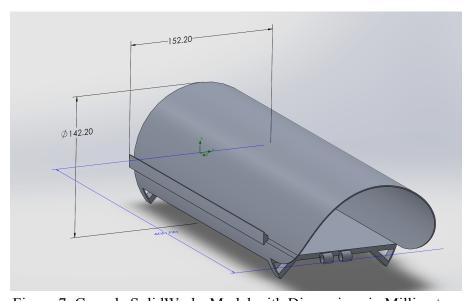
Capsule SolidWorks Model with Dimensions in Millimeters
